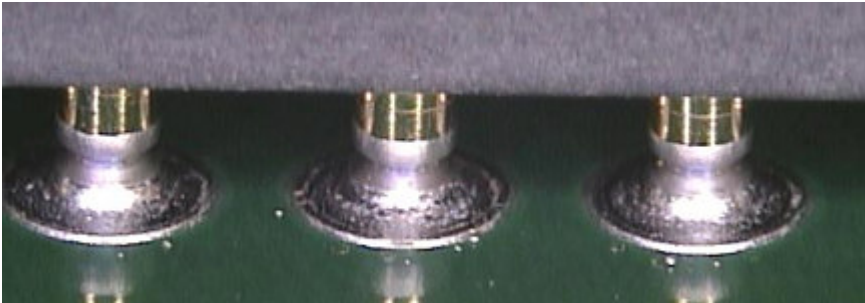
& 4 - Picture of board assembly – bottom veiw (Matte Tin terminal – Gold PCB)
